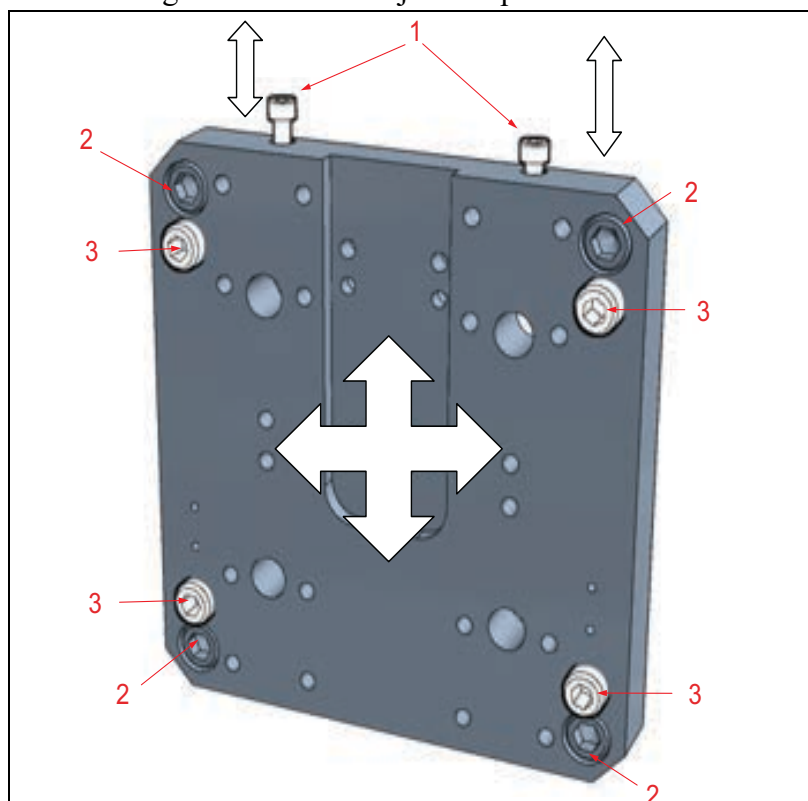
MILLING HEAD MOUNTING PLATE AND TRAMMING POINTS
